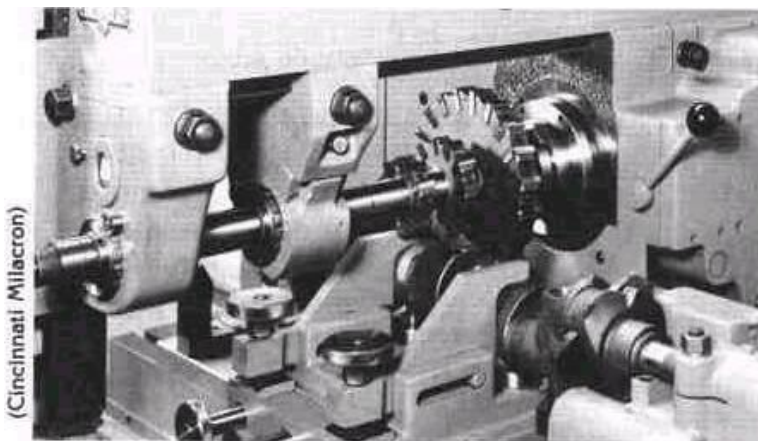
Milling a crankshaft in a special fixture. A style B arbor is used with two arbor supports.
